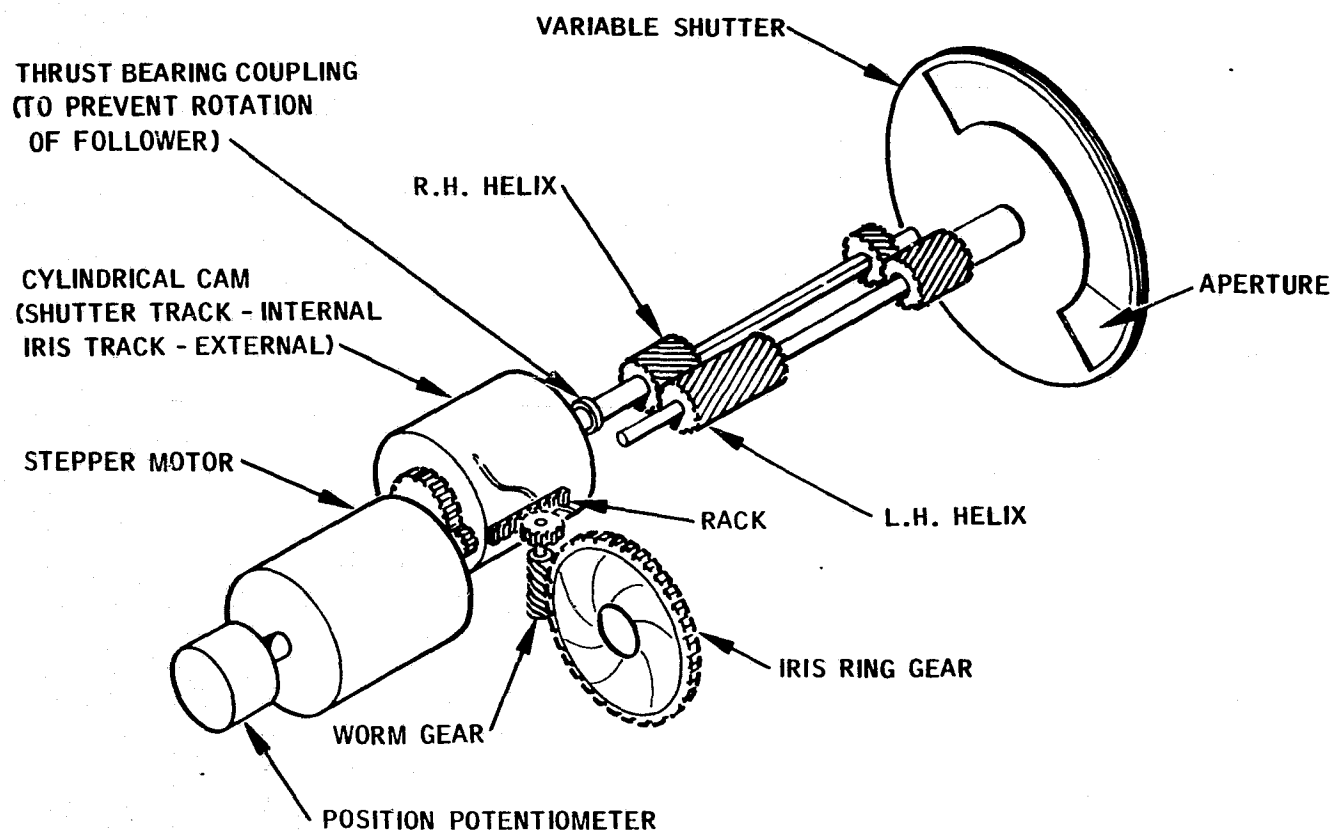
Variable Shutter and Iris Control Helical Gearset
